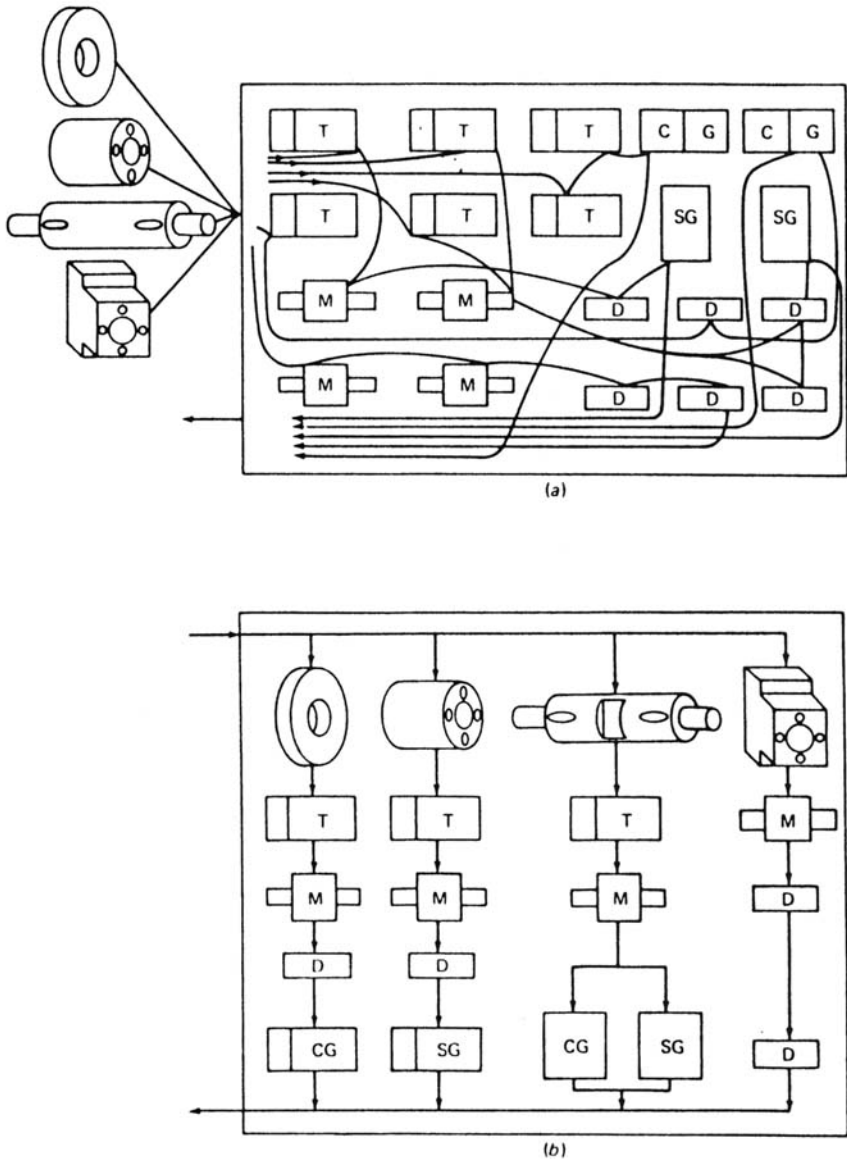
Plant layout of machine tools will vary but they are normally positioned by (a) machine type or functional layout or (b) material flow or group layout. T, turning; M, milling; D, drilling; SG, surface grinding; CG, cylindrical grinding. (Courtesy of McGraw-Hill Book Co.)
